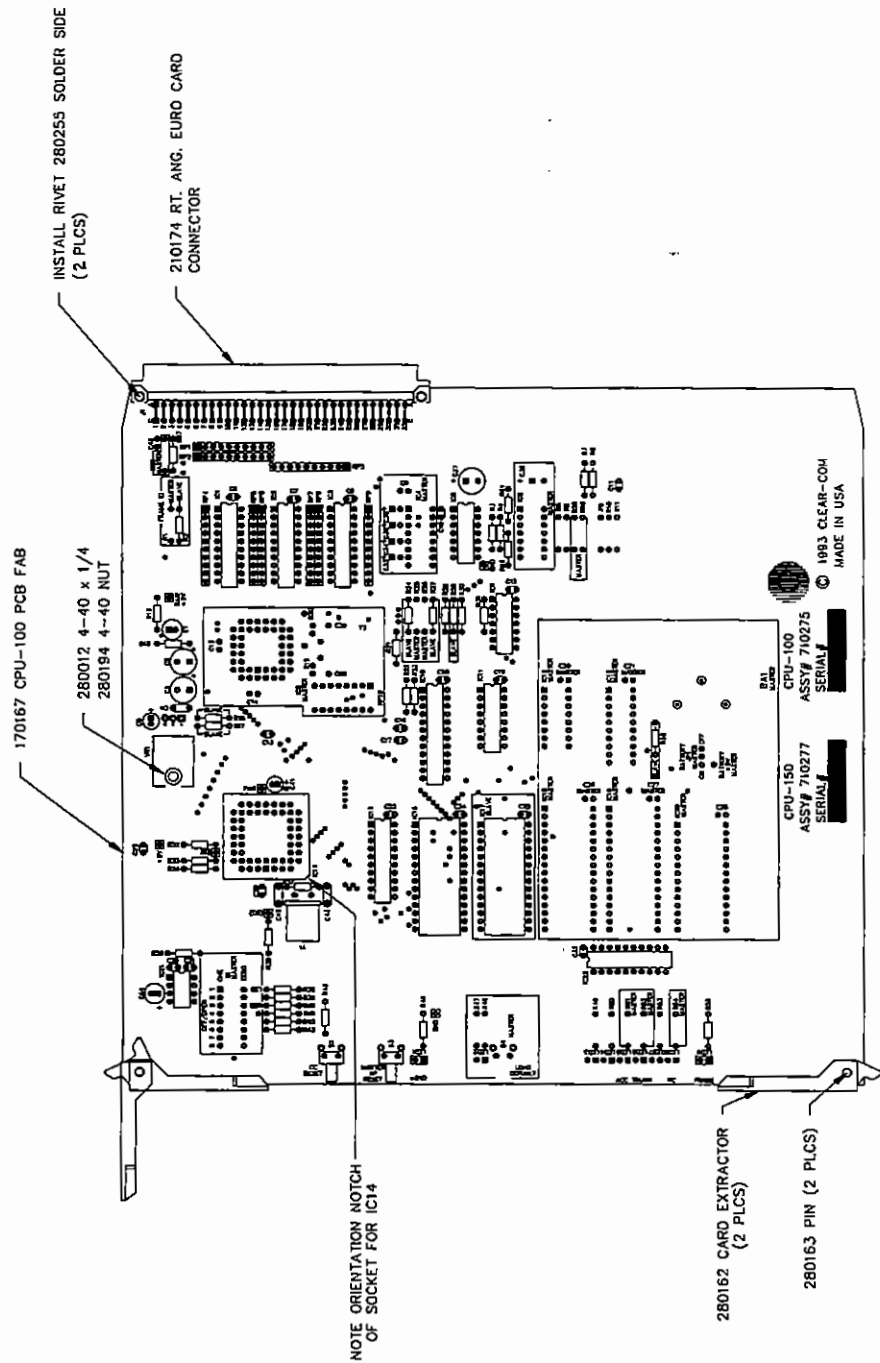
Assembly Drawing - CPU-150 PCB Rev. C
